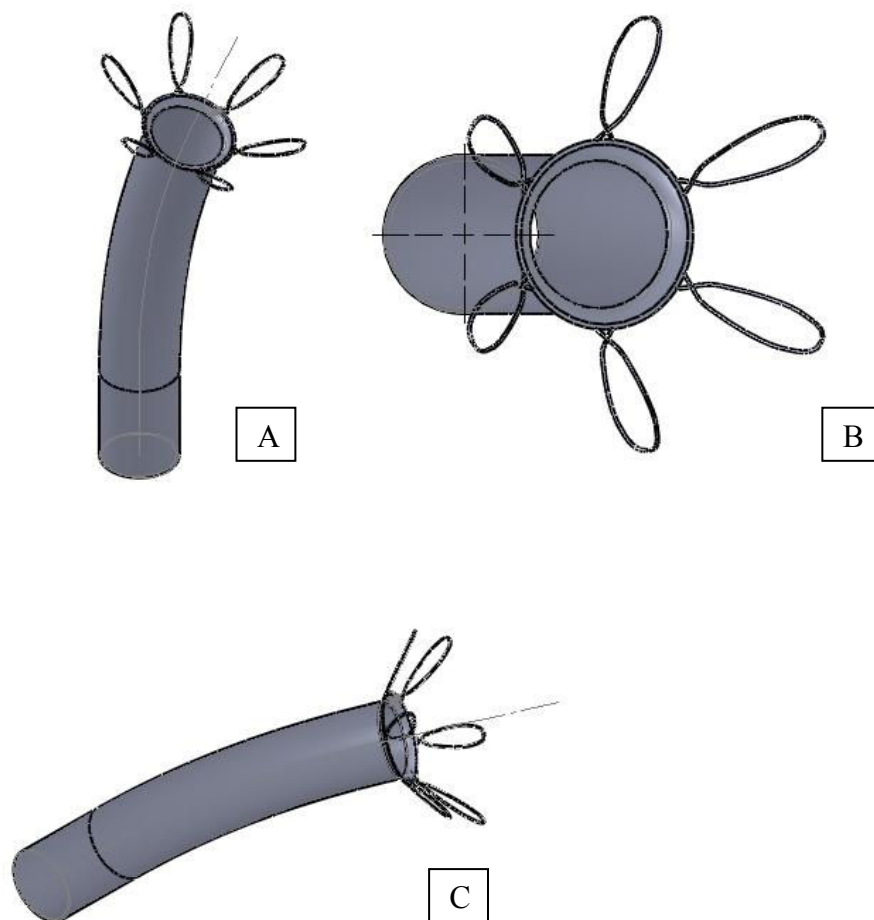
PASS selected in SolidWorks. (A) Isometric view; (B) top view;(C) side view.
